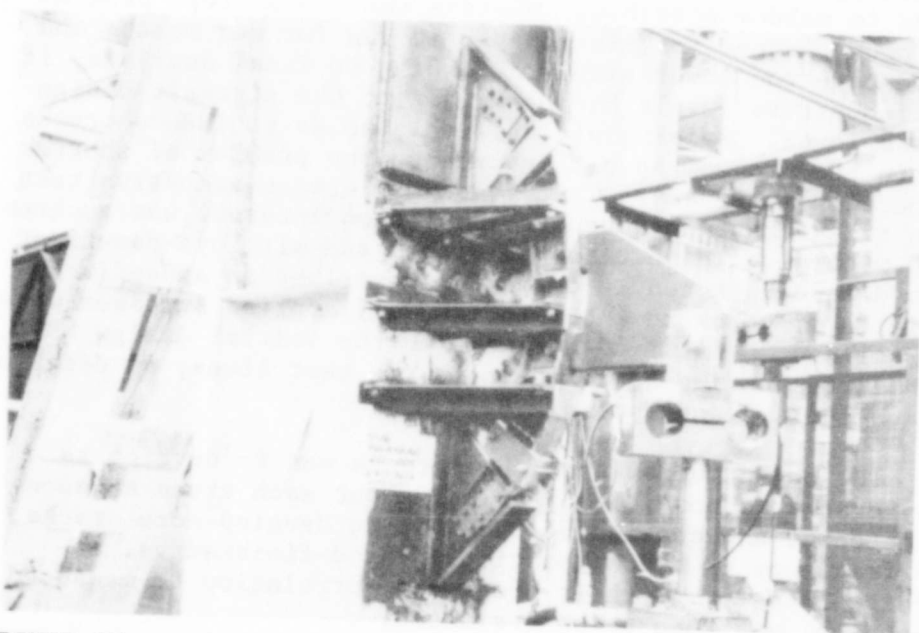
YF-16 TITANIUM FRAME IN FATIGUE TEST FIXTURE
